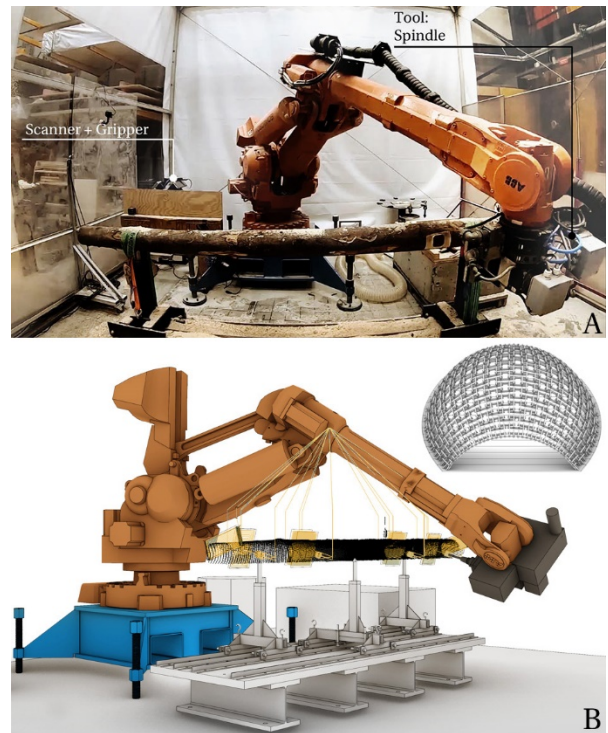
A – Milling machining operation following B – tool-path aligned to a point-cloud.
